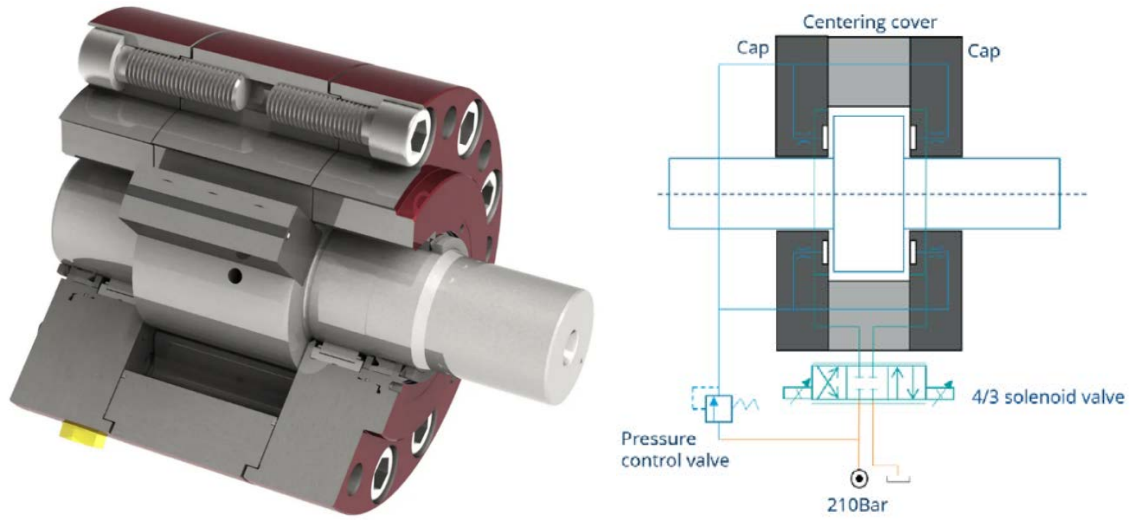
Swivel drive SP 15 D and typical hydraulic layout of the thrust bearing
